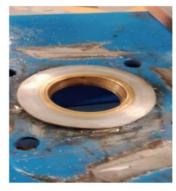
Bushing on the design of the beverage plastic bottle waste machine
